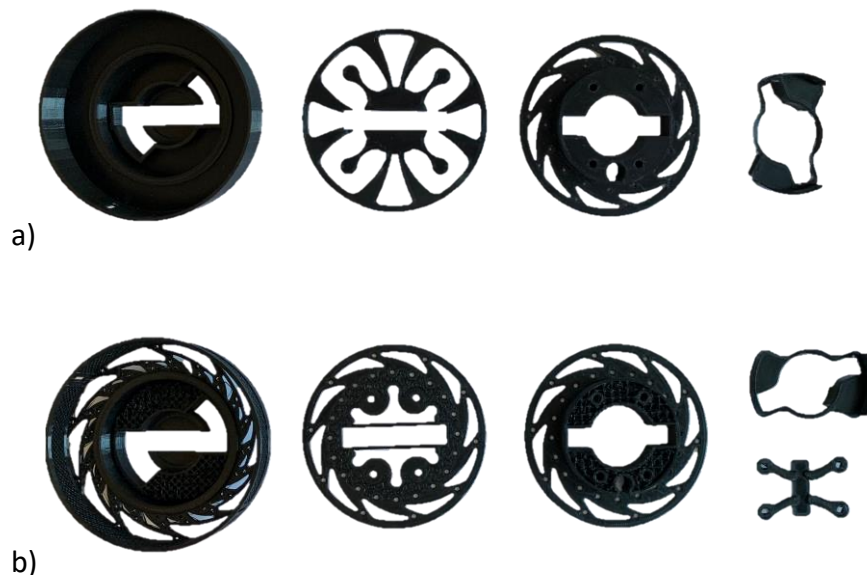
a) First printed prototype. b) Final prototype. (Source: Author's own)
